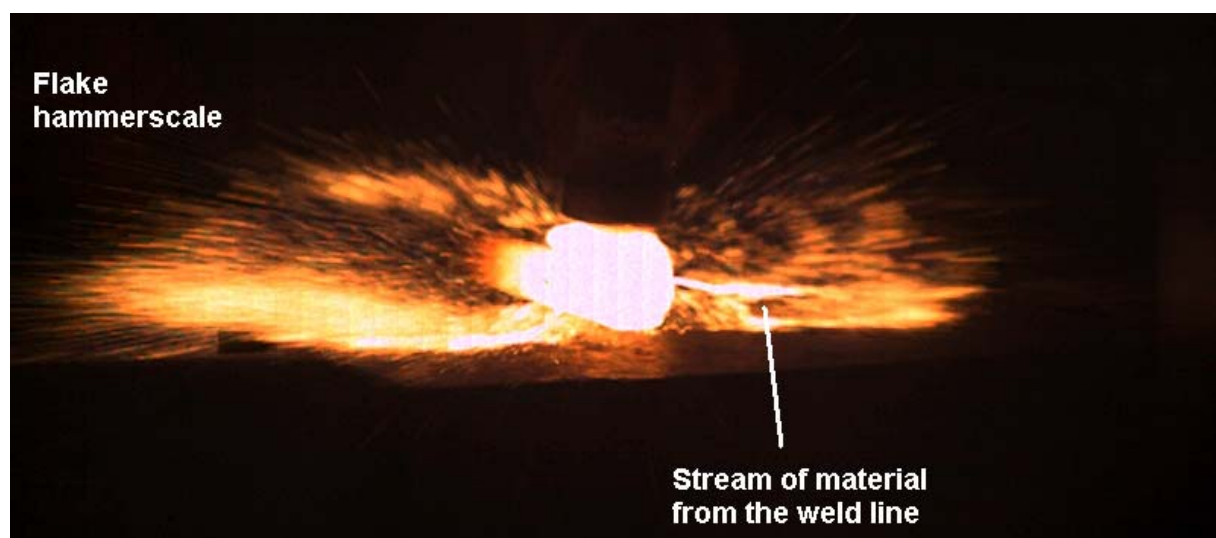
Welding experiment 16. Still from the high-speed digital camera 6 frames after the impact
